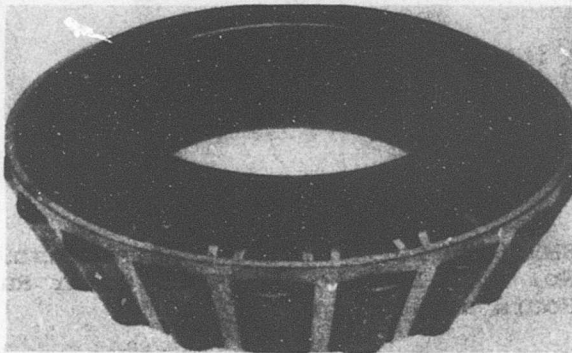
HM926700-Series Bearing After Test, Bearing No. T-10--Okay After Running in Test No. 24.
